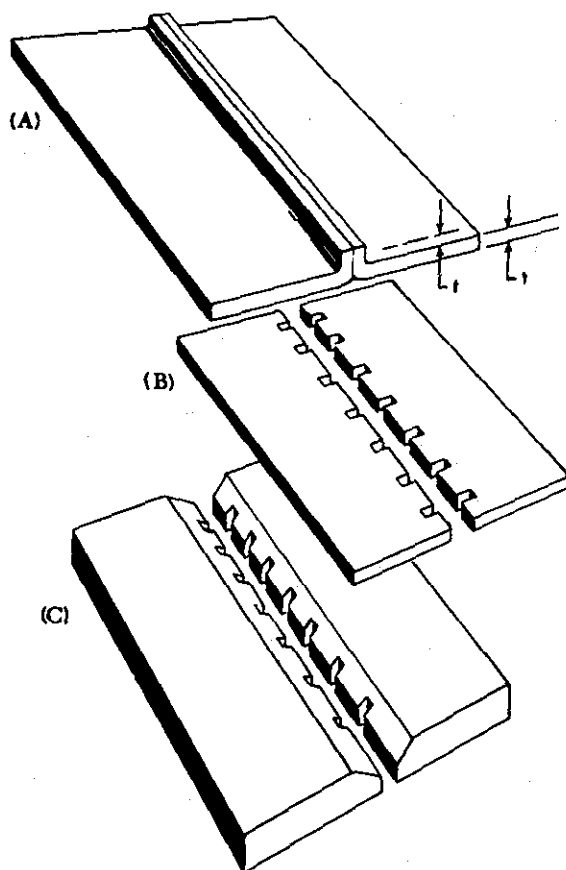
Edge preparation for welding aluminum.
